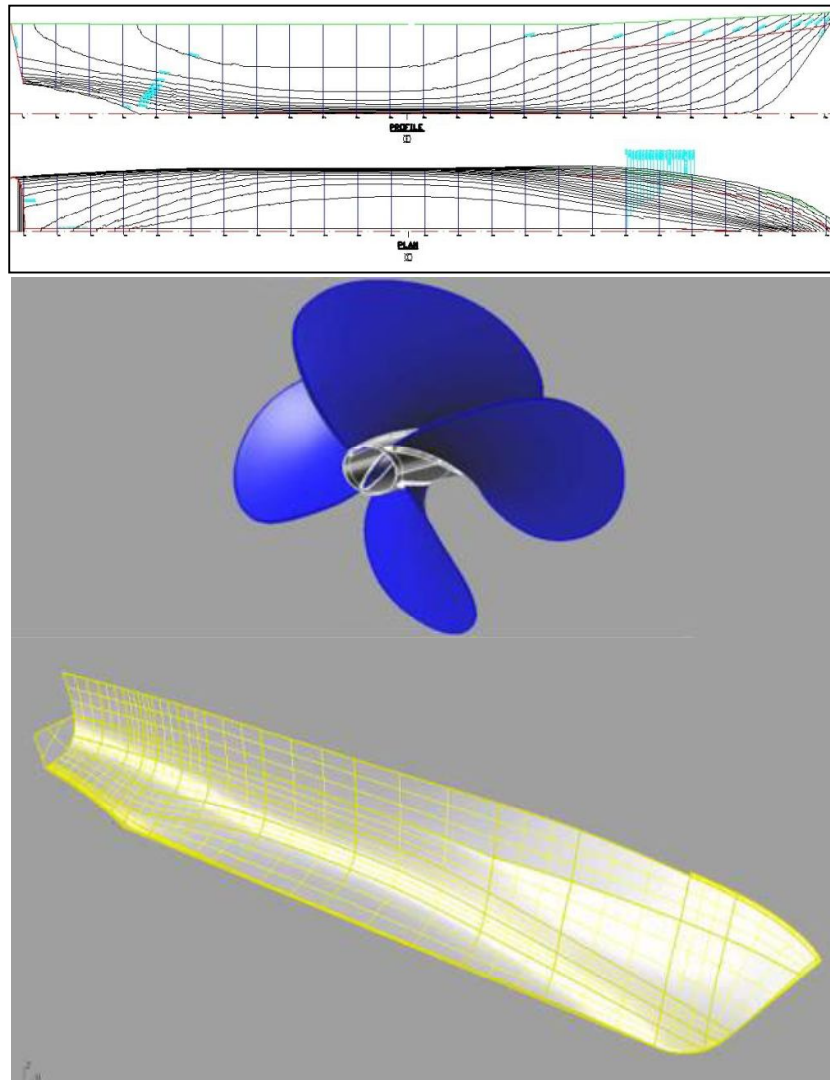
Lines plan and Hull of the offshore patrol vessel and Existing propeller of the vessel
